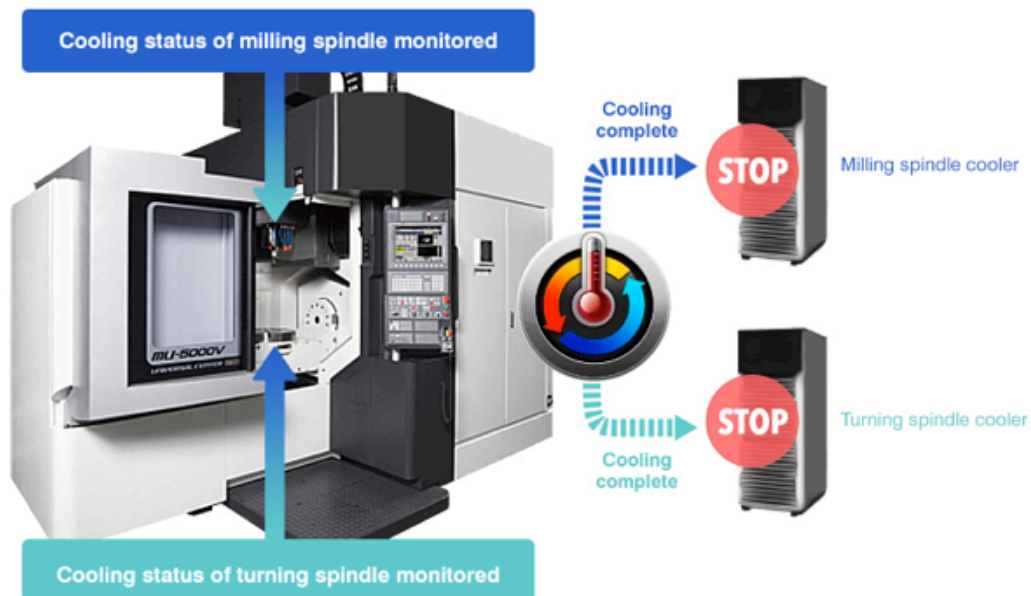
ECO Idling Stop turns off spindle coolers when cooling is complete. (Note: On MU-V-L 5-axis machining centers, cooling is stopped on respective milling and turning spindles.)
